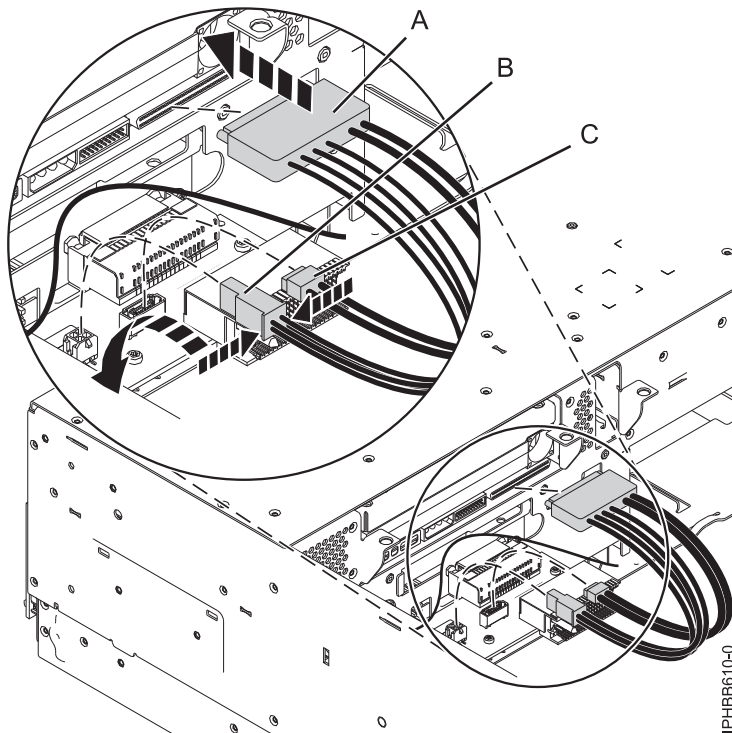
Connecting the cables to the 2.5 inch small form disk drive backplane
